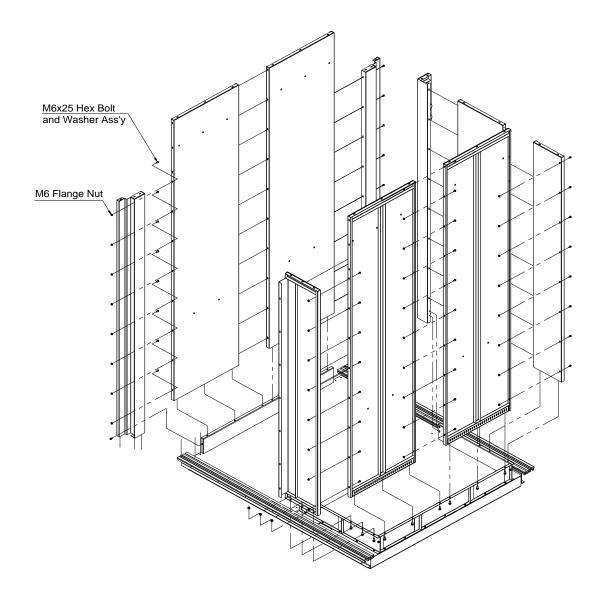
C. CAR PANEL ASSEMBLY (FRONT and REAR ENTRANCE)
